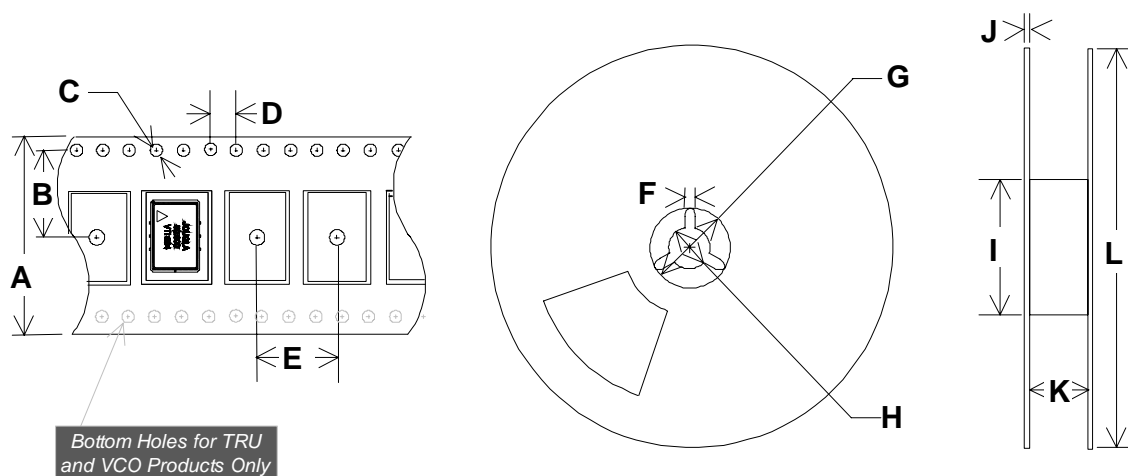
Tape Reel Drawing for CMOS and PECL output option
